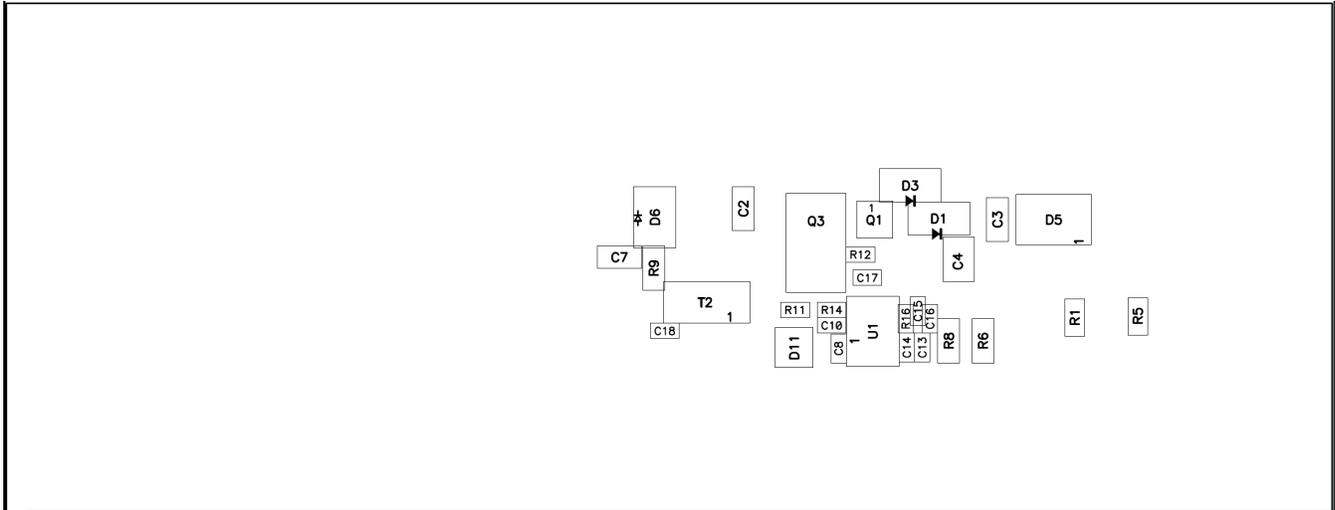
TPS92070EVM-682 Bottom Layer Assembly Drawing (bottom view)
